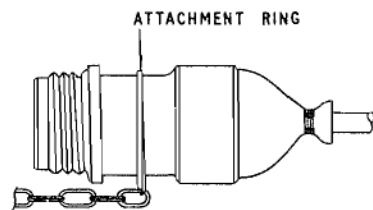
(2) Alighting gear test box (Mod. G.E.1339)
